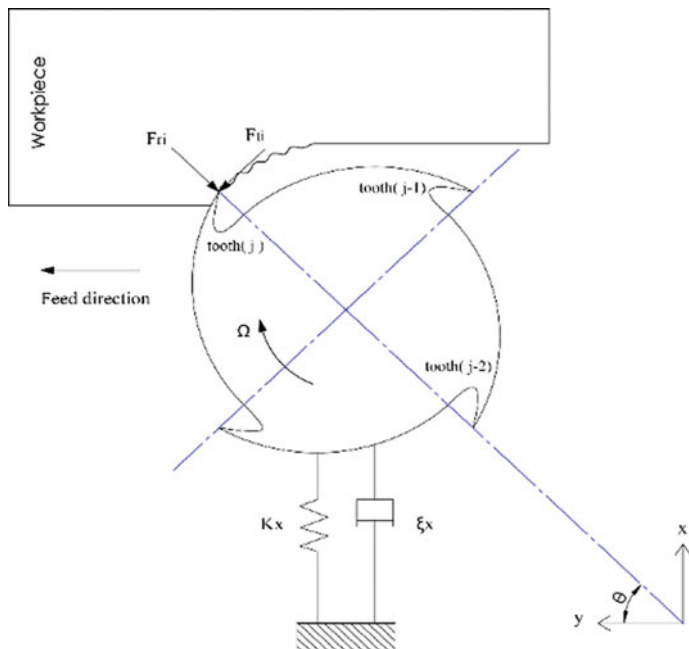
Dynamic model of the thin-walled workpiece–tool system
